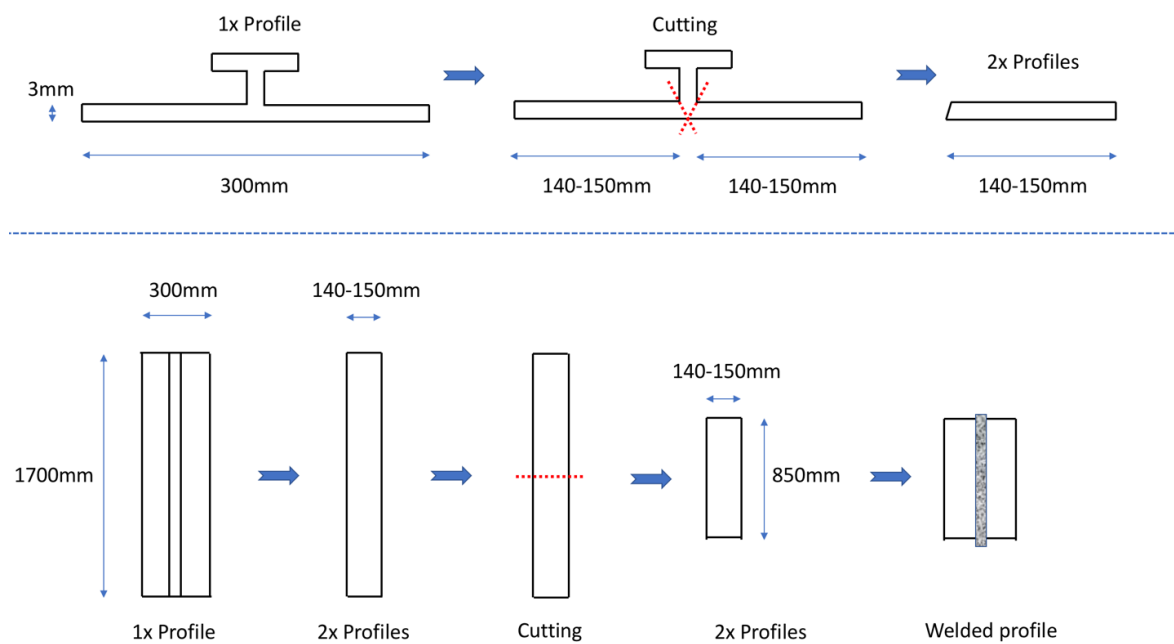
Work process of the cutting process and welding of the received profile to welded product.
